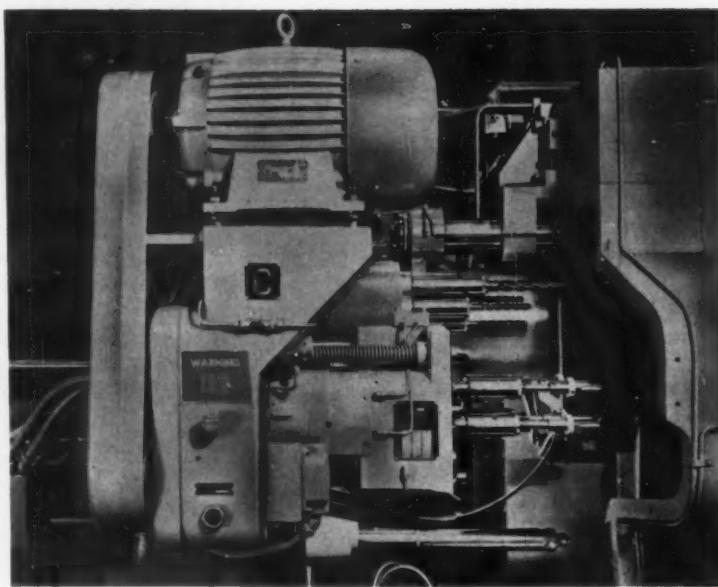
A tapping head is mounted on each of the main tool-heads of Cross trunnion type machine (Fig. 1)
